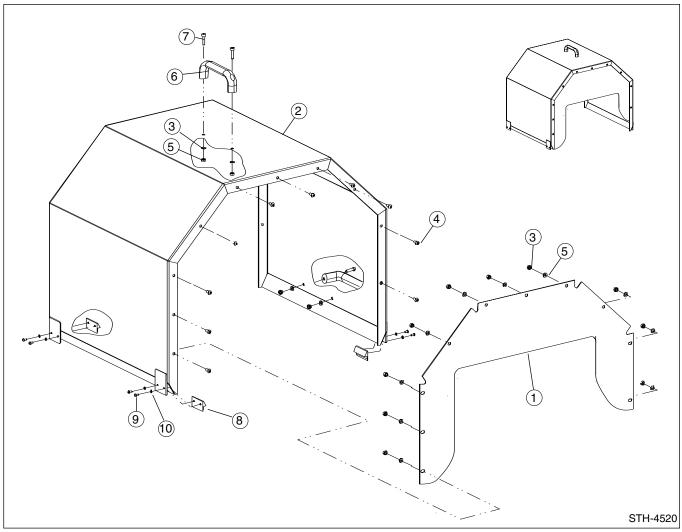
FIGURE M - REMOVABLE SPLASH GUARD ASSEMBLY, FRONT
